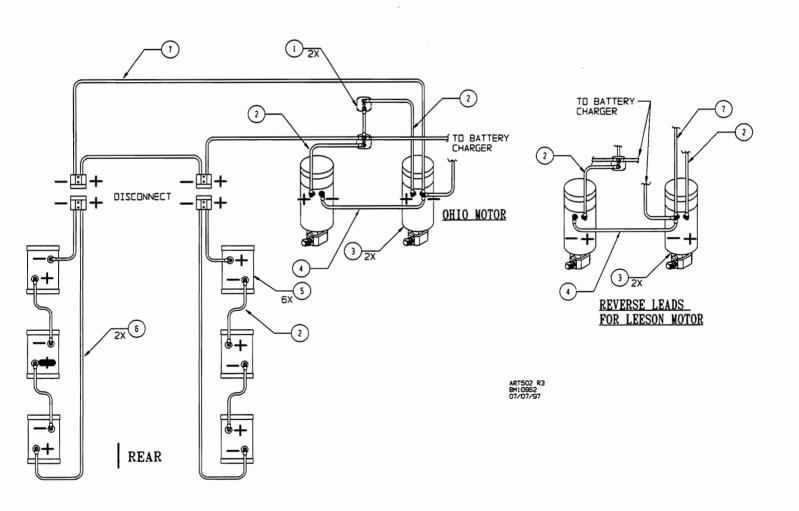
High Torque Series Battery & Motor Cable Layout
